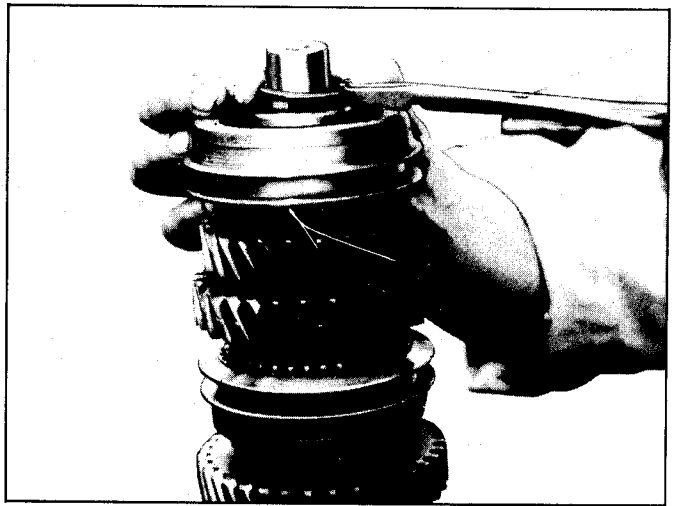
B-9K--Removing 3-4 Clutch Assembly Retainer
